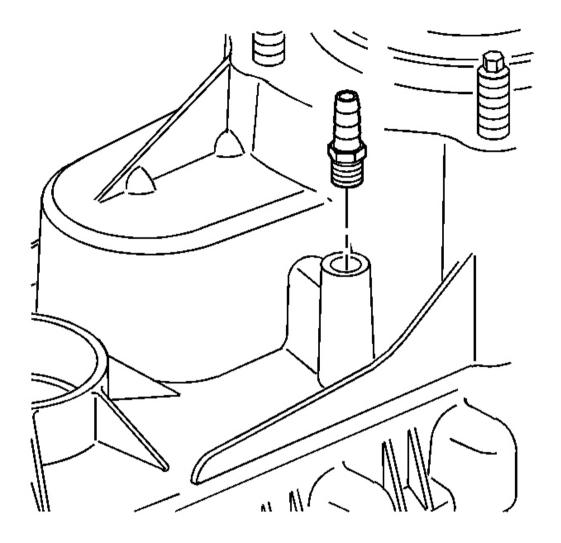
Vent & Front Case Half Courtesy of GENERAL MOTORS CORP.
